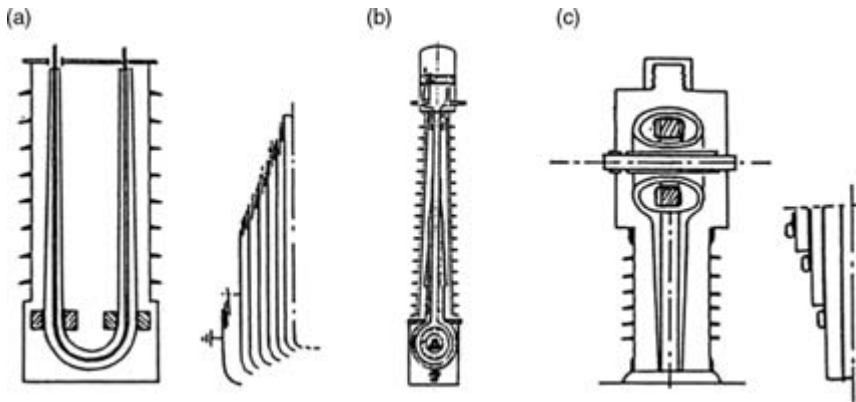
Examples of current transformer (HVCT) configurations. (a) Hairpin type; (b) Eye bolt type; (c) Bar primary type
